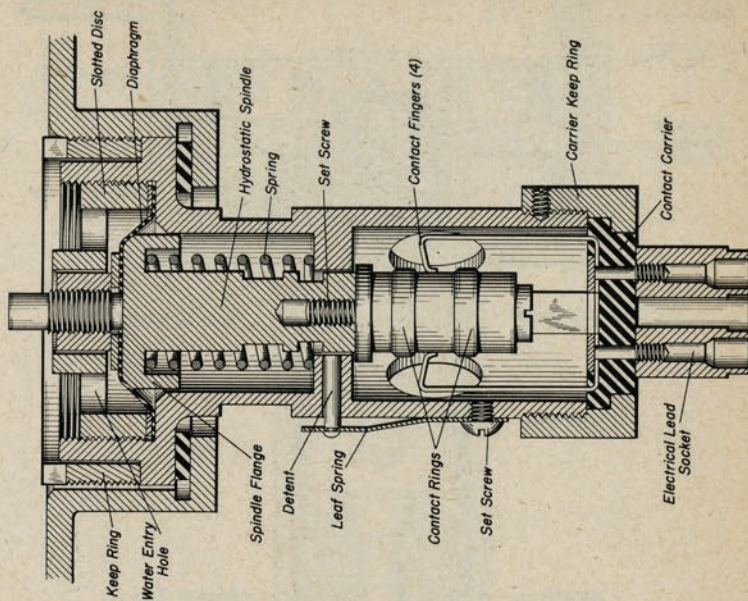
Mine Type JI, Hydrostatic Arming Switch, Sectional View
